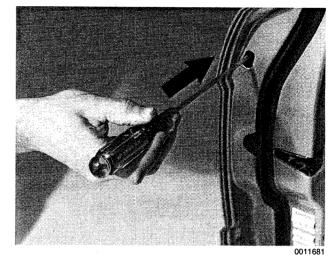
Insert screwdriver into access hole and push locking plate forward (arrow) to release exterior handle trim.
